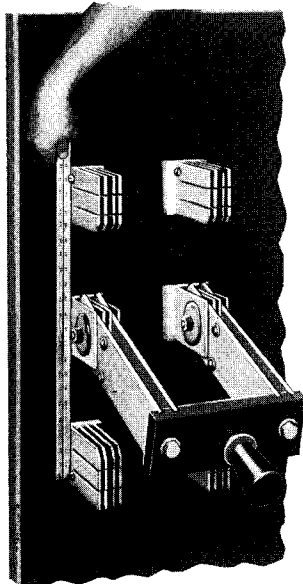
When mounting new switches or remounting old ones we recommend that, the outside blades of the hinge and break jaw first be checked to see that they are in line. A steel scale may be used for this purpose when the switch is dead.
